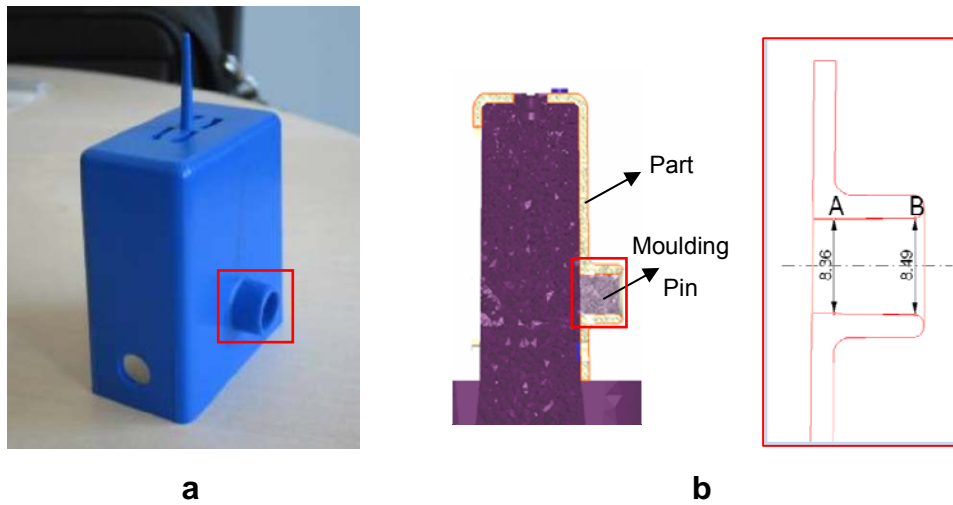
HM-2 moulding: a) Back detail, b) Dimensions A and B for shrinkage analysis
